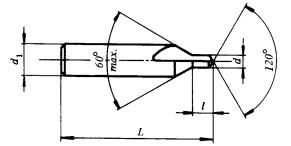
Single-ended centre drill – Type A – ($d \leq 0.8$ mm)
